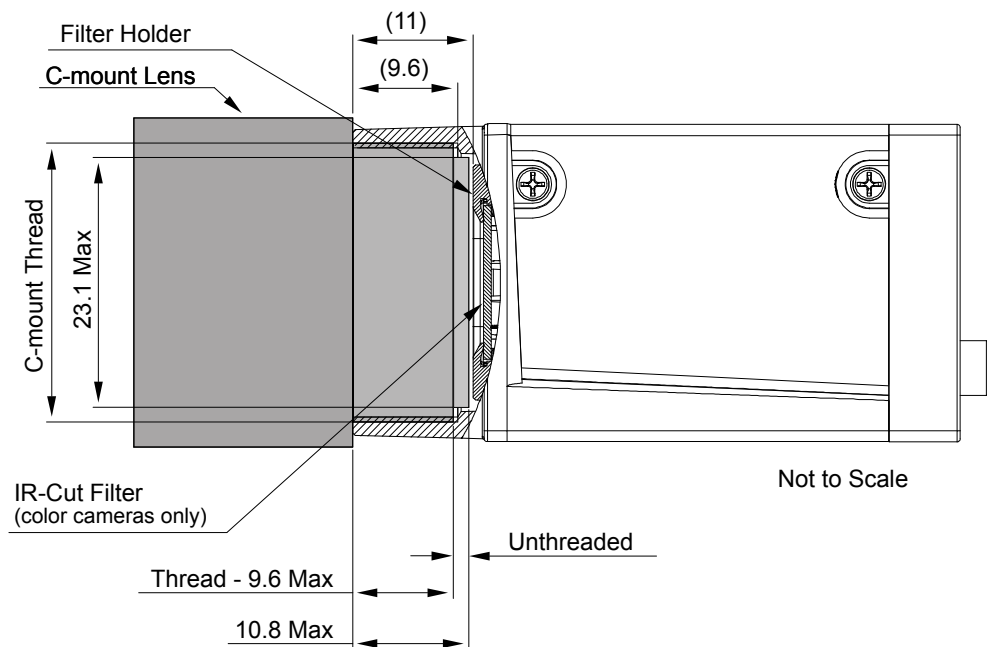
Maximum Lens Thread Length (dimensions in mm)
